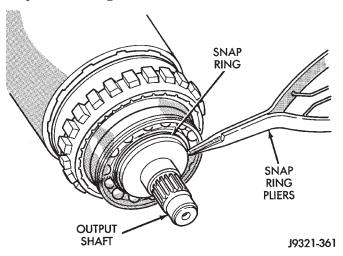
Rear Bearing Snap Ring Removal/ Installation
